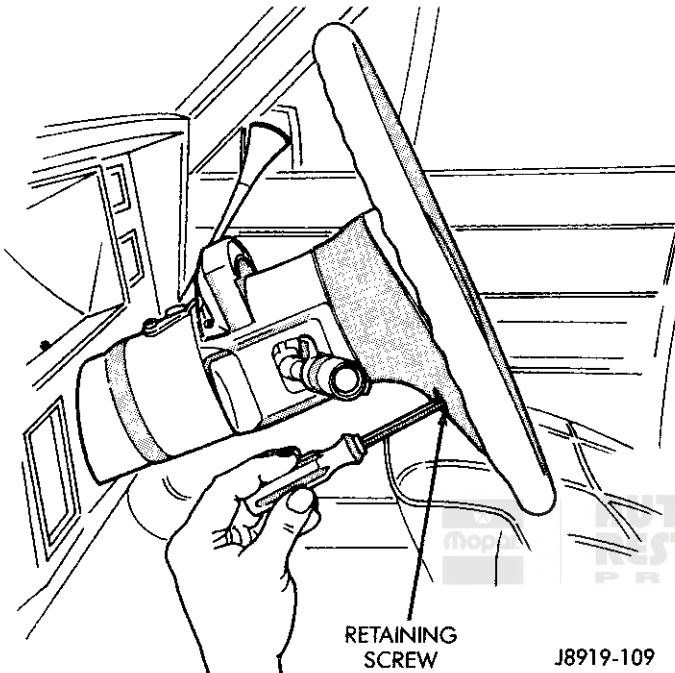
Standard Steering Wheel Cover Removal/Installation
